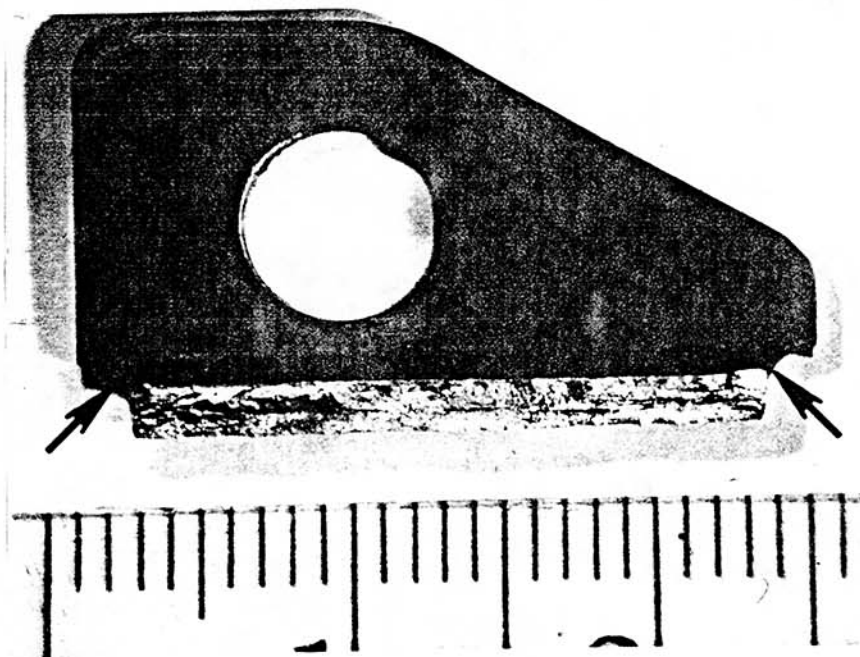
Right side view of failed retainer boss showing fracture surface with punched stress-relief holes on each and (arrow) (rear end at right).
